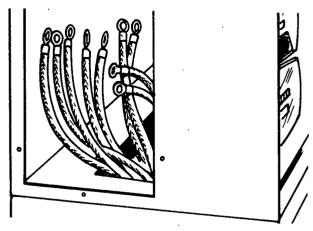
CONTROL BOX (SIDE PANEL REMOVED)
